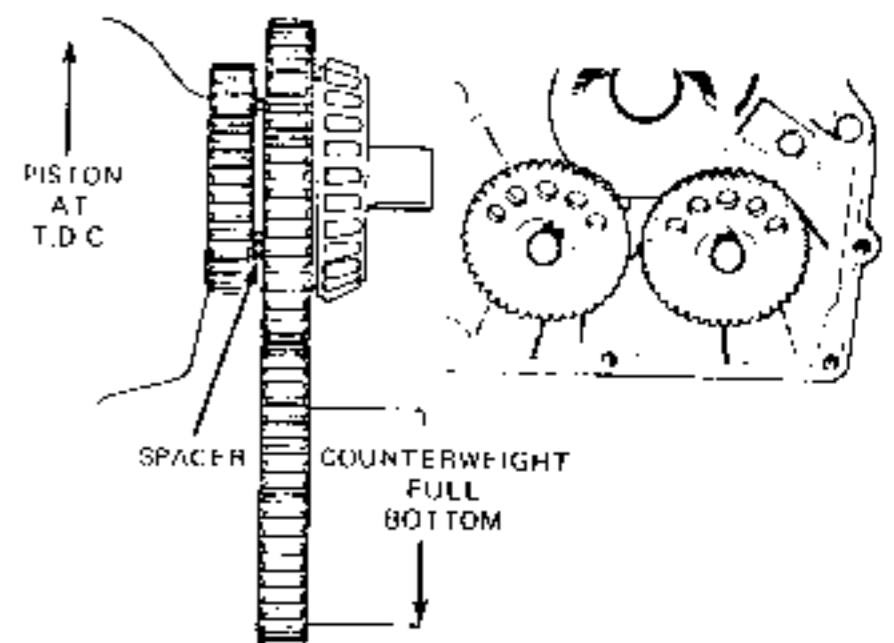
Balancer gears are correctly timed to crankshaft when piston is at TDC and weights are at full bottom position.
